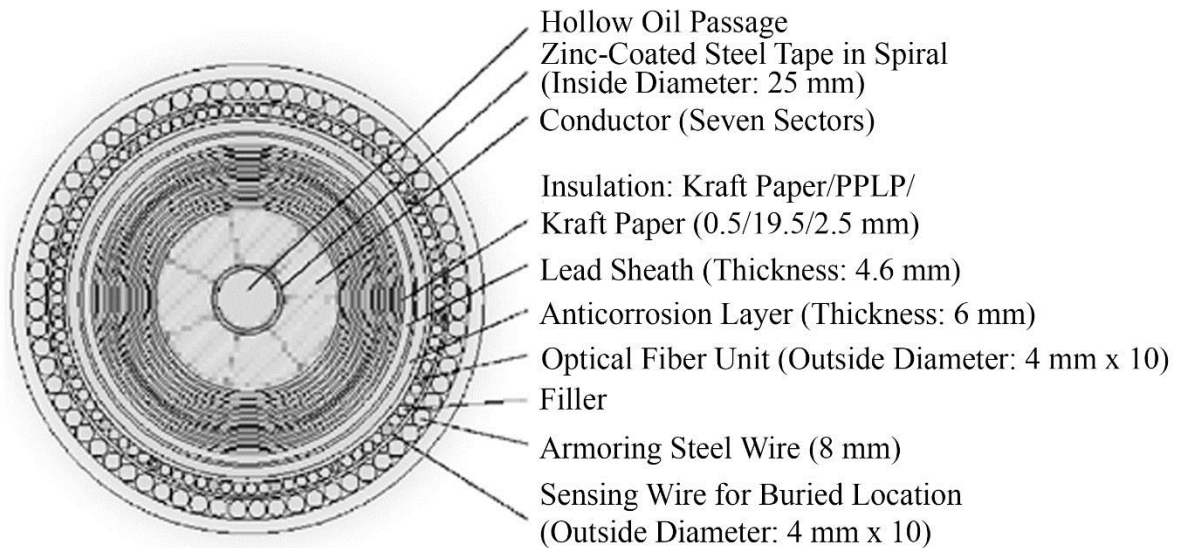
Cross-sectional view of oil-filled cable [9]
